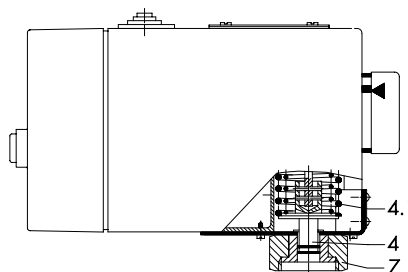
· Type 5822-60/-70 Electric Actuator with fail-safe position "Out"
